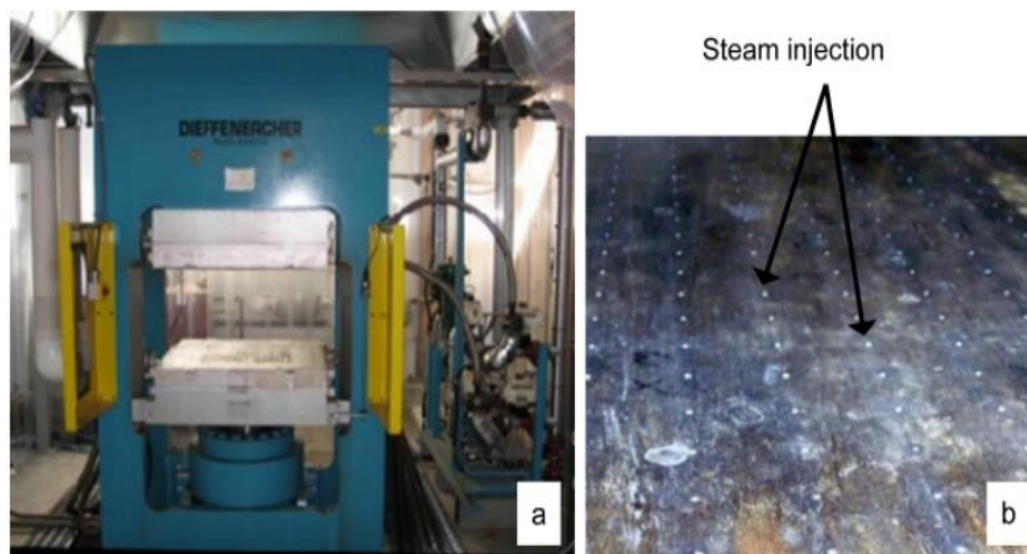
Steam injection hot press used for THM densification treatment. a) 862 mm × 862 mm hot press, b) press platen with steam injection holes.
